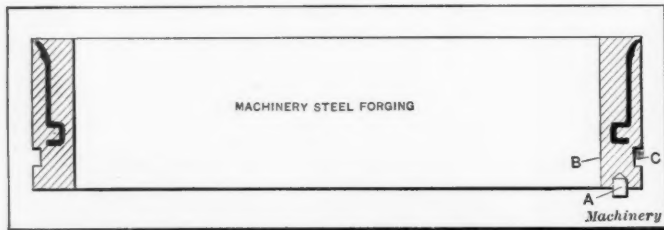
Forged Steel Ring for Automobile Clincher Rim
